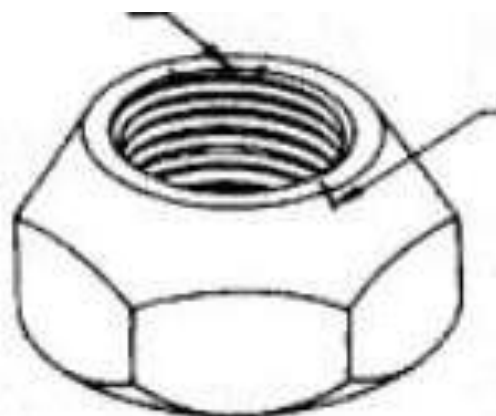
Cracks in the locking part of the all-metal effective torque lock nut.
